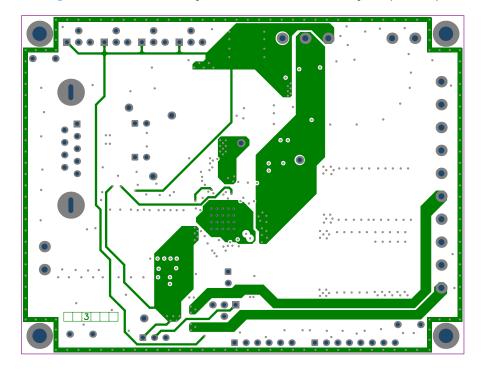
SPSB100G 6-Layer Demo Board - Top Layer
